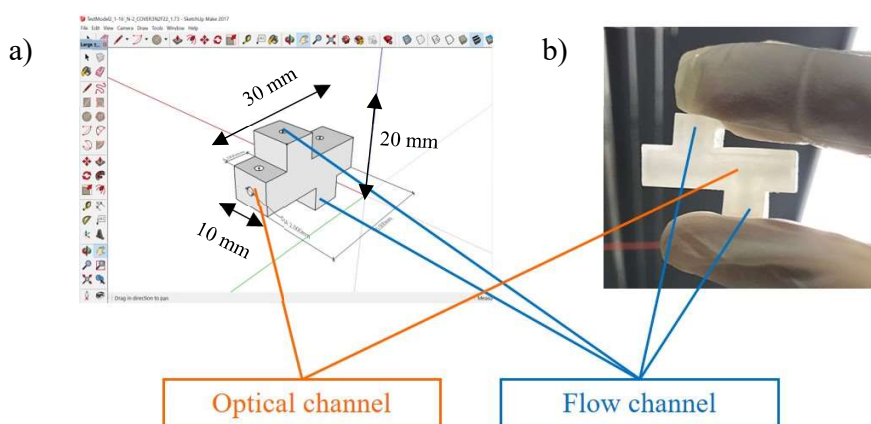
a) 3D CAD design (10 mm×30 mm×20 mm, diameter = 2.0 mm) b) Real image of the silicone 3D printed optical module.
